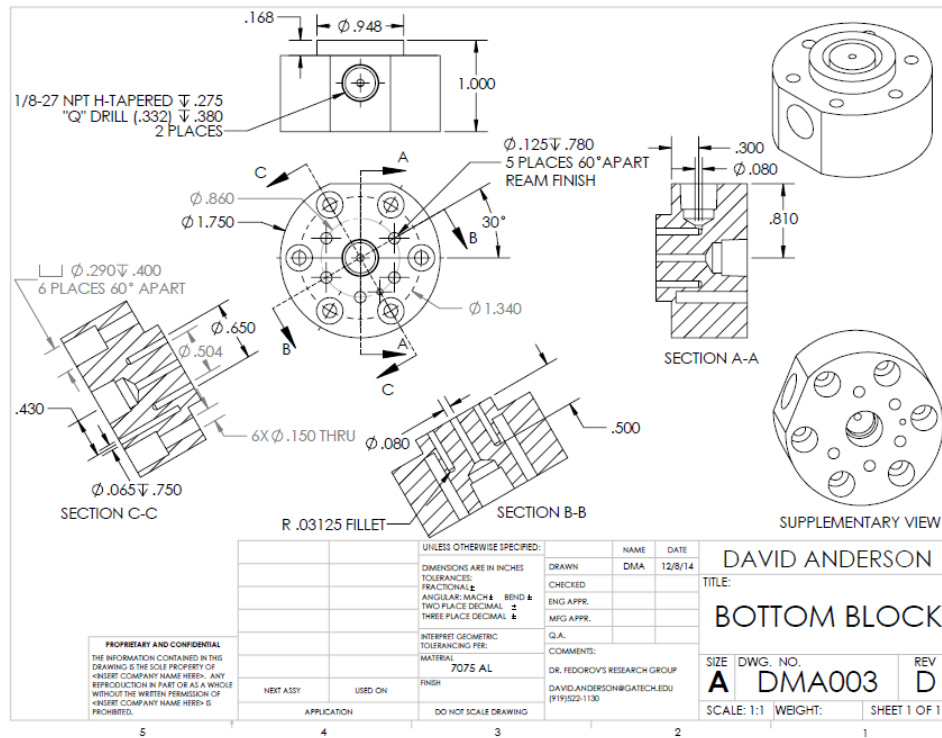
CHAMP-SORB Reactor Bottom Block Part Drawing
